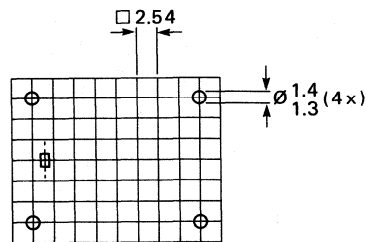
Hole pattern for mounting on a printed-wiring board. Viewed from the solder side.
